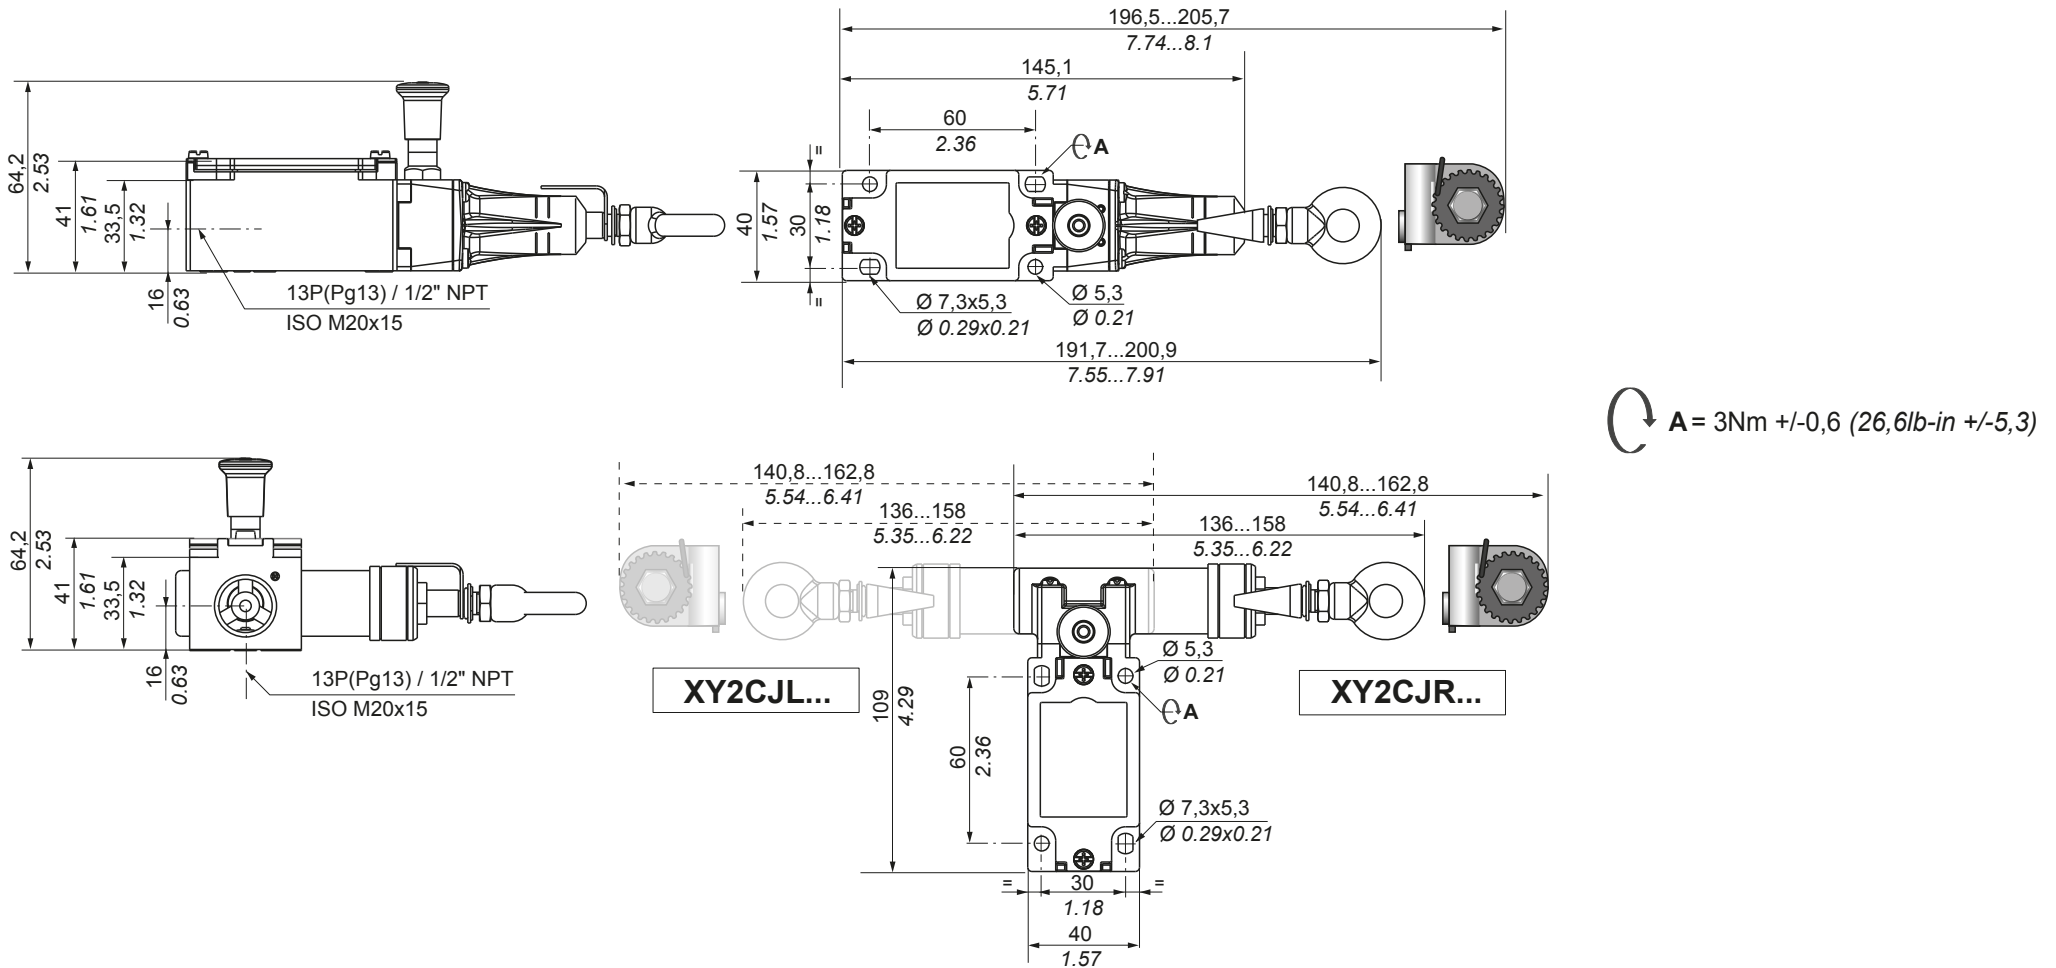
Dimensions / Encombrements / Abmessungen / Dimensiones / Dimensioni / 尺寸
